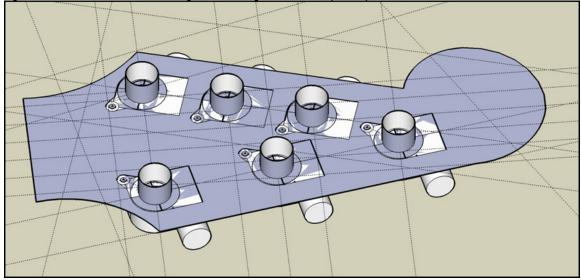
The final headstock design with tuning machines super-imposed on surface.
